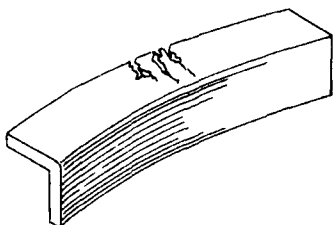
HEEL-OUT SECTIONS — COMPLETELY WRAPPED
